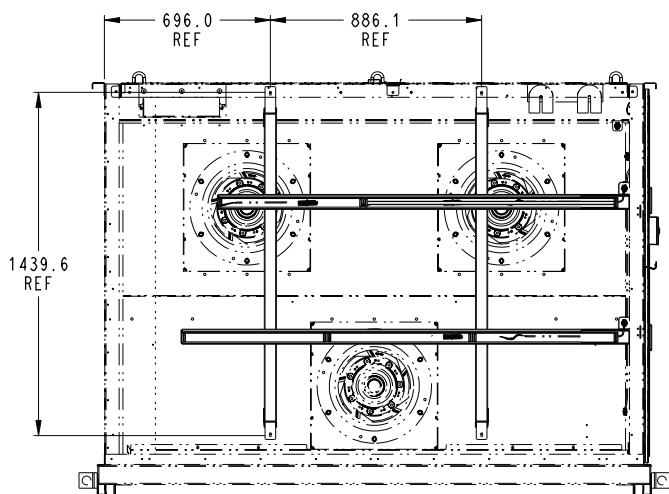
Typical UV-C Lamp and Fixture Kit Installation on 48/50V (27-50 Tons)
